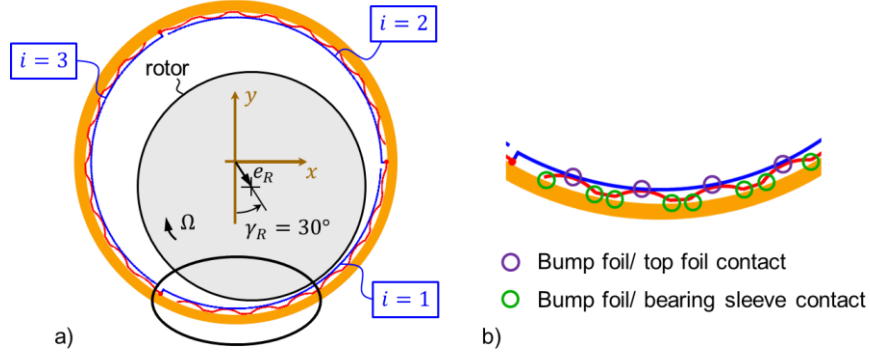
Three-pad air foil journal bearing with rotor (a) and contact slave nodes on bump foil (b)
